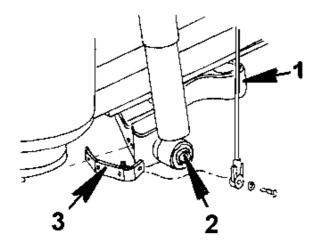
Lower Shock Absorber Mounting Bolt Removal
